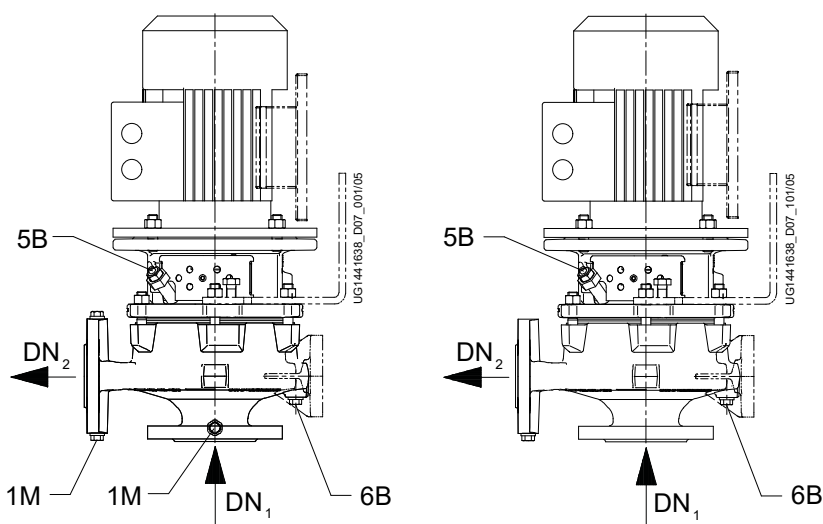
Left: Version with pressure gage connection; right: Version without pressure gage connection
